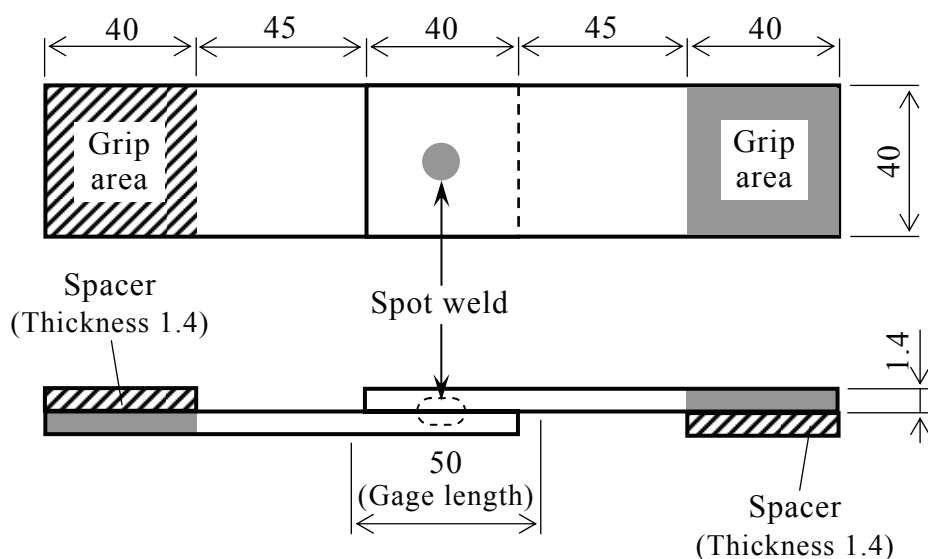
Shape and dimension of tensile-shear specimen with a spot weld (unit : mm).
